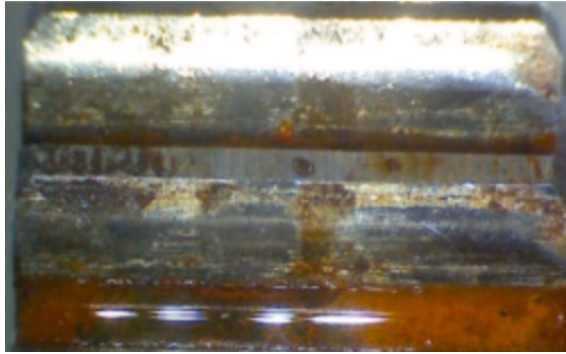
Rusty gear teeth due to tribocorrosion [45].
